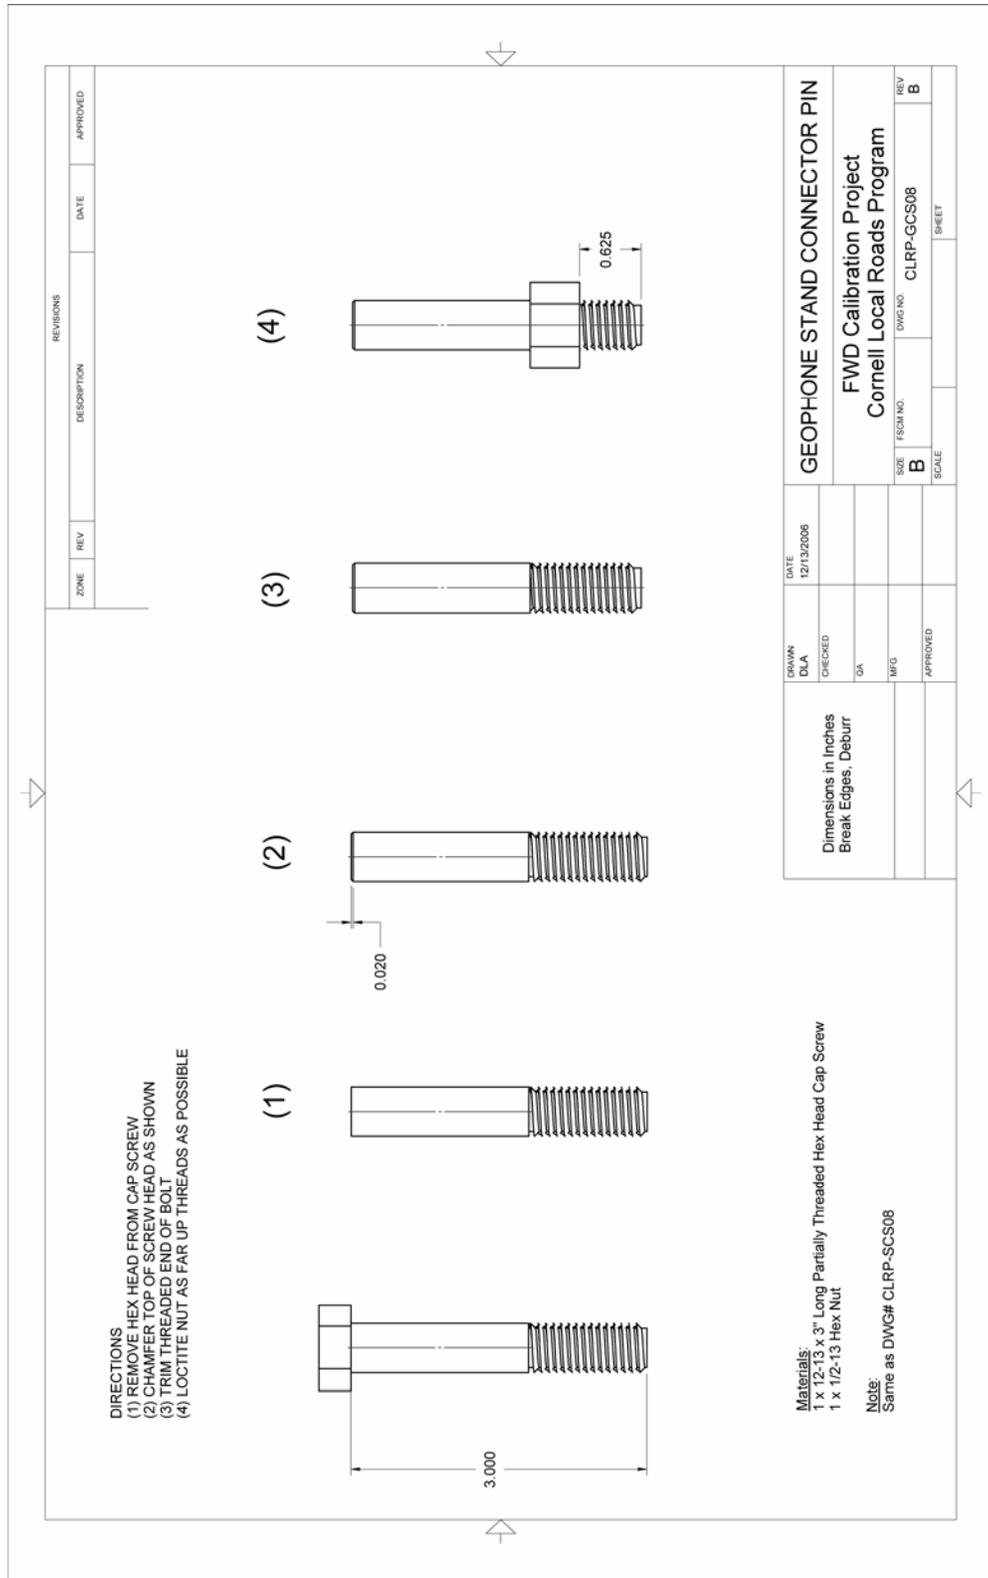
Drawing. CLRP-GCS08 Geophone Stand Connector Pin.
